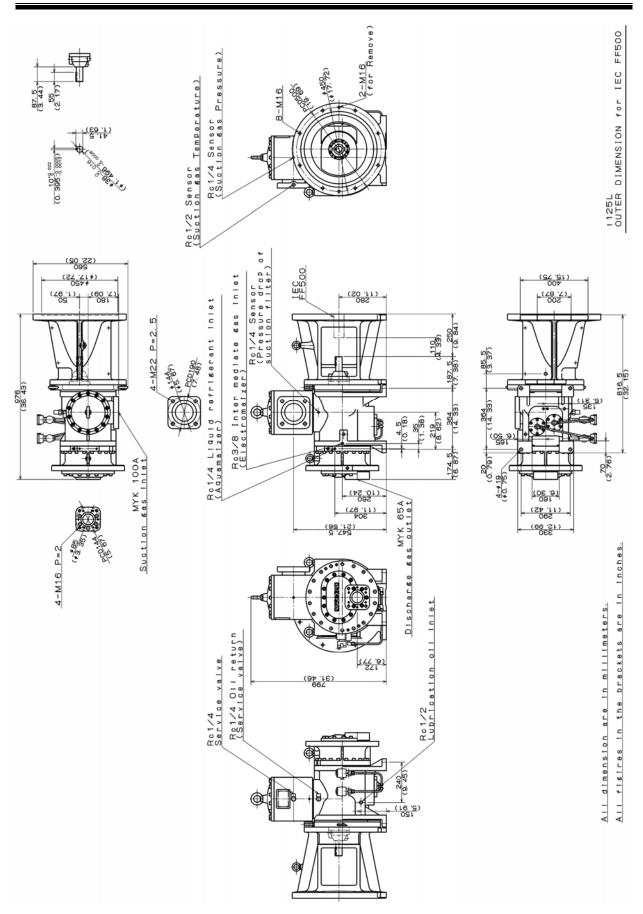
i125L Outer Dimensions with a Spacer for Flange Motor (IEC FF500)
